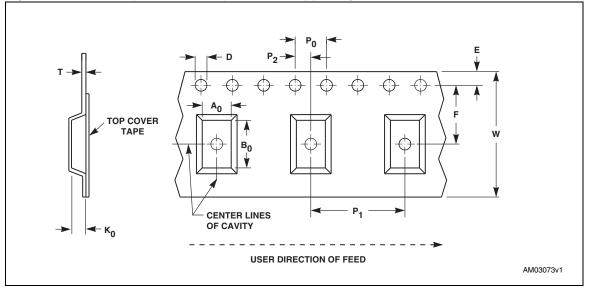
Carrier tape for TDFN12 (2 mm x 3 mm) package
